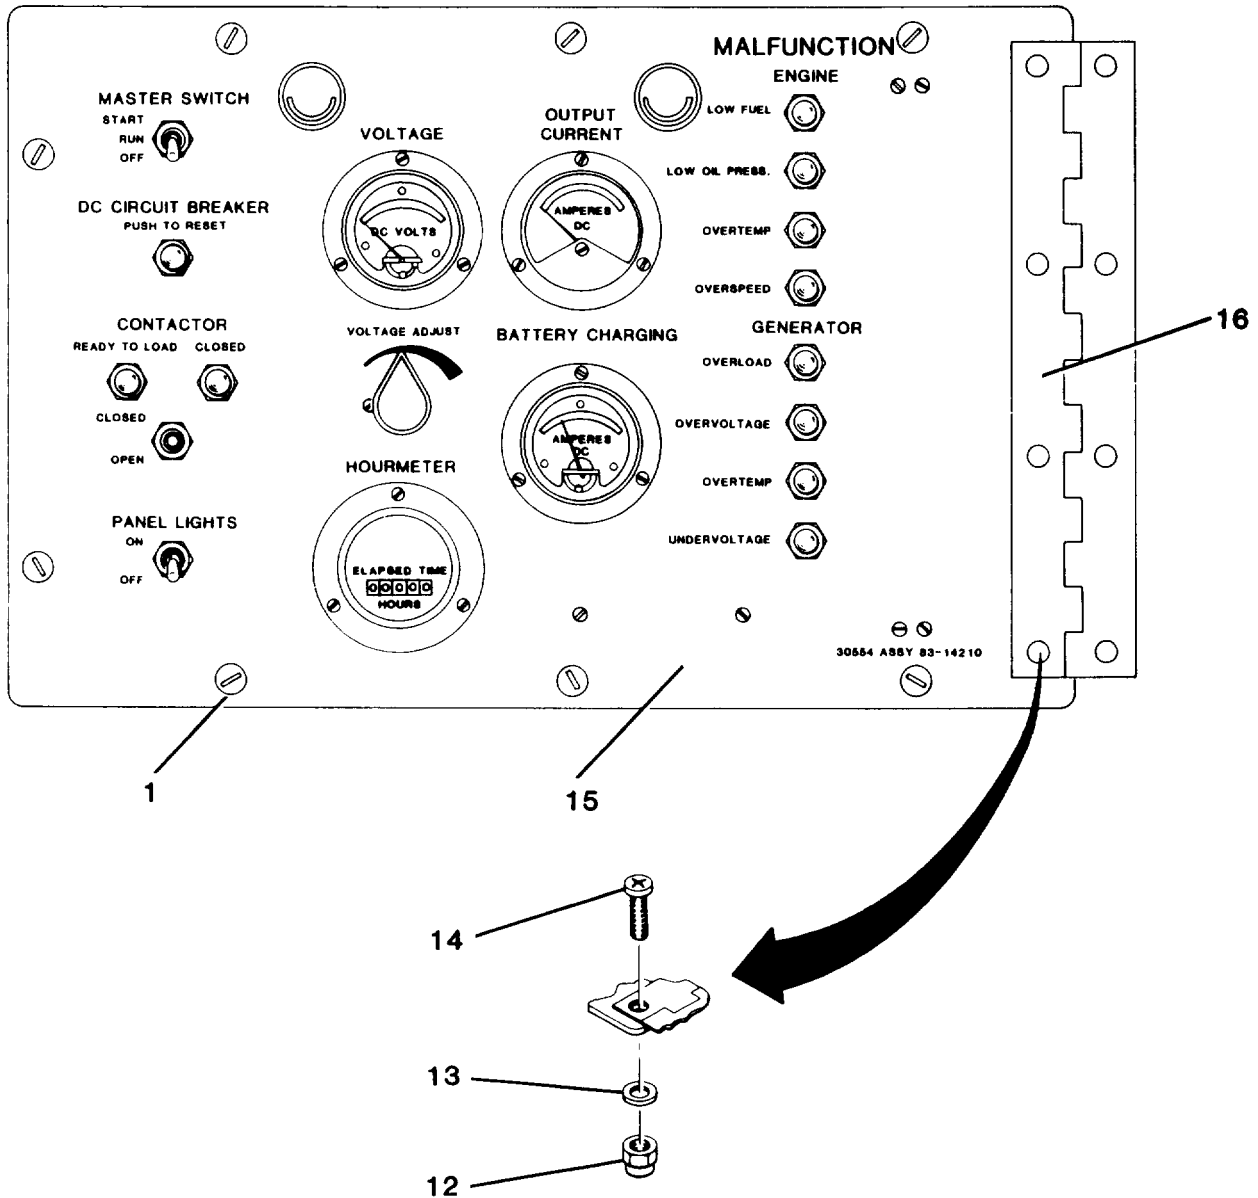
Control Panel Replacement (Sheet 2 of 2)
